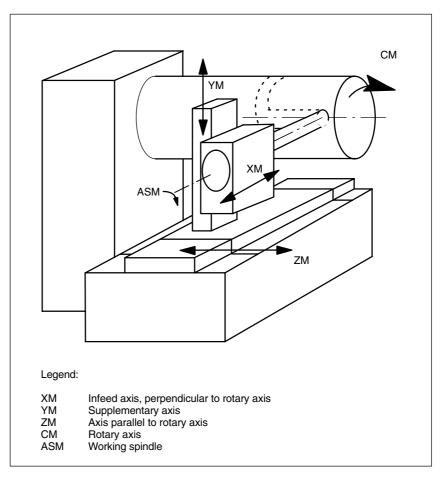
Machining grooves on generated cylinder surface with X-Y-Z-C kinematics
